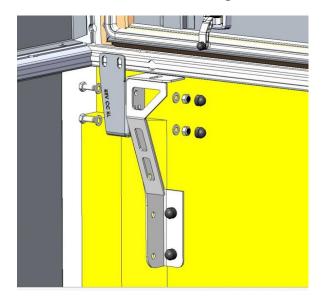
Top Rear Mount Bracket positioned with M8x20 hex head bolts, washers, nyloc nuts and nut caps.
